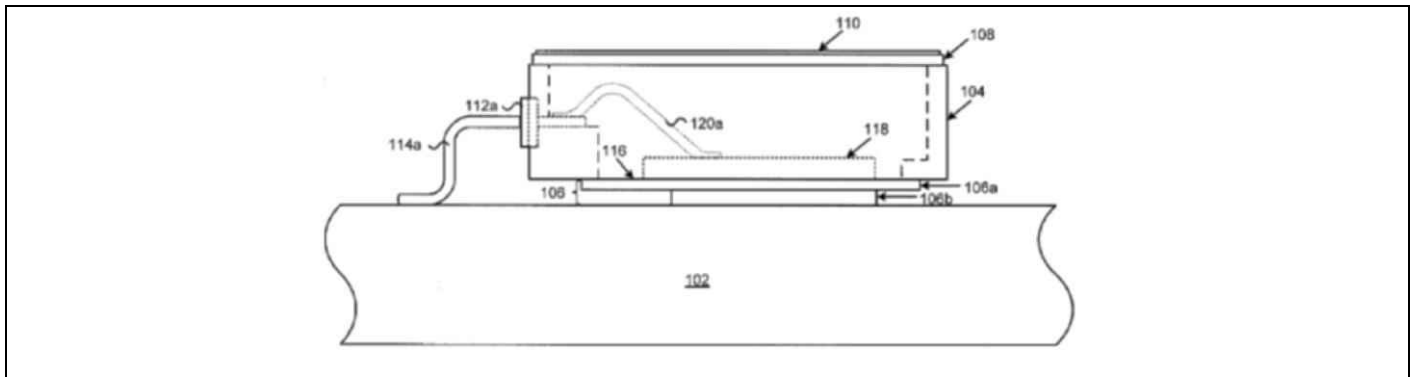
The SupIR-SMD, a new design concept (cutaway view showing chip and wirebond inside)
